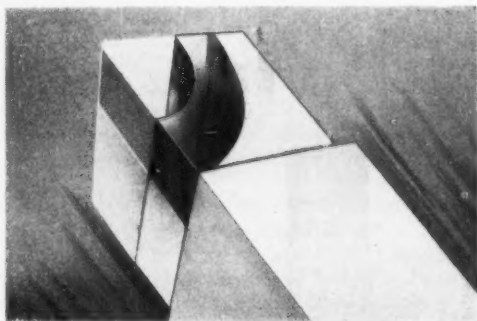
Form Tool with Concave Radius Produced from a Standard Bar Turning Tool
